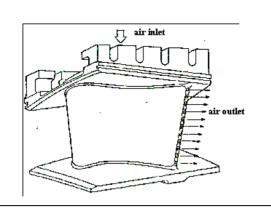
air inlet and air outlet for blade cooling [2-5].
